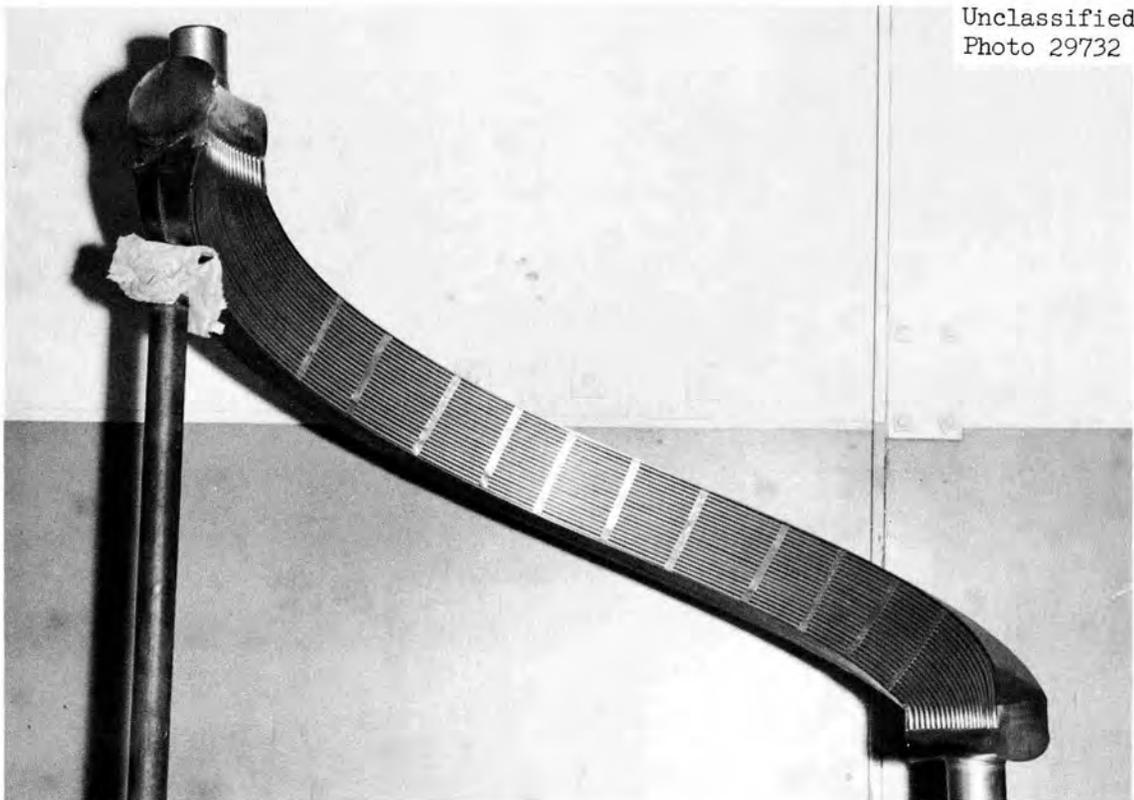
Large Heat Exchanger Fabricated by Industrial Concern Using the Welded and Back Brazed Procedure.
